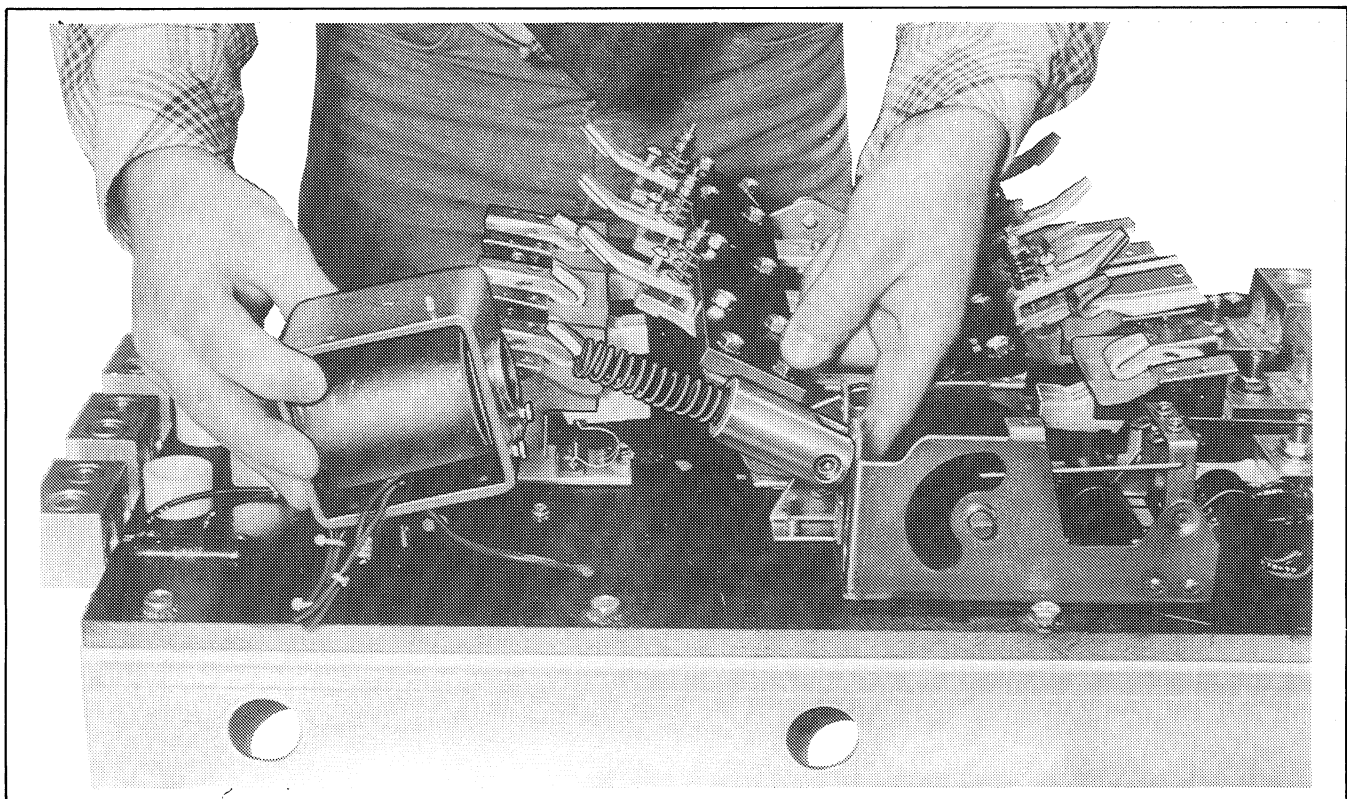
600-800 Amp. Contactor Coil Replacement
